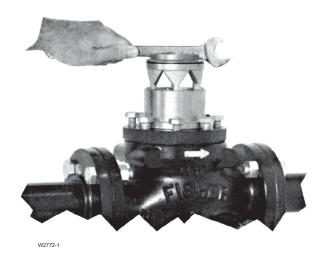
Seat Ring/Cage Removal or Installation Using Body as Holding Fixture
